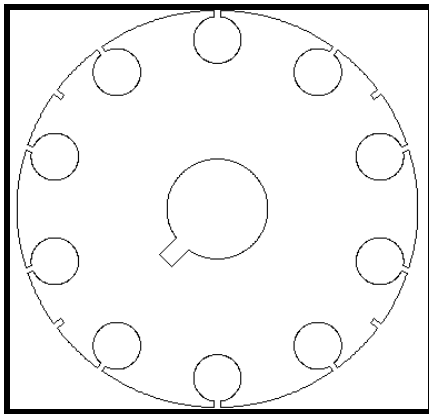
AUTOCAD DESIGN OF ROTOR BAR FOR BOTH THICKNESSES
